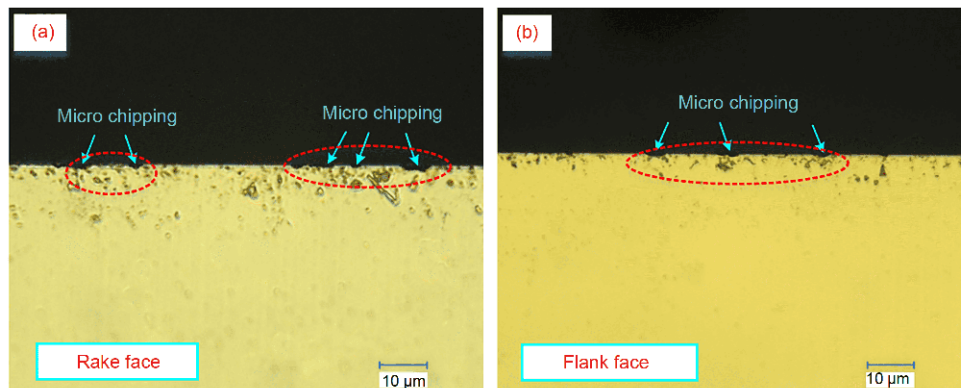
(Color online) Microphotographs of tool face after deburring tests. (a) Rake face; (b) flank face.
